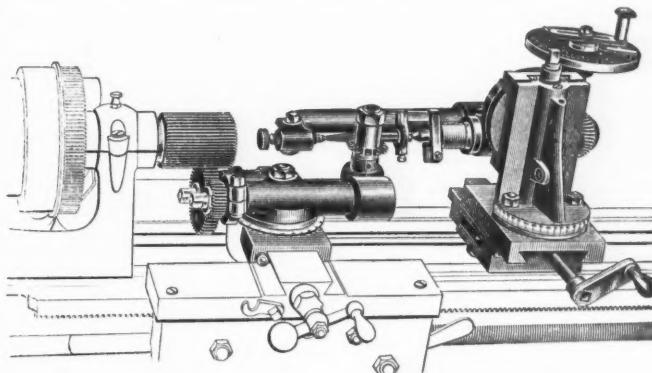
Milling Attachment in Position for Fluting a Reamer.
